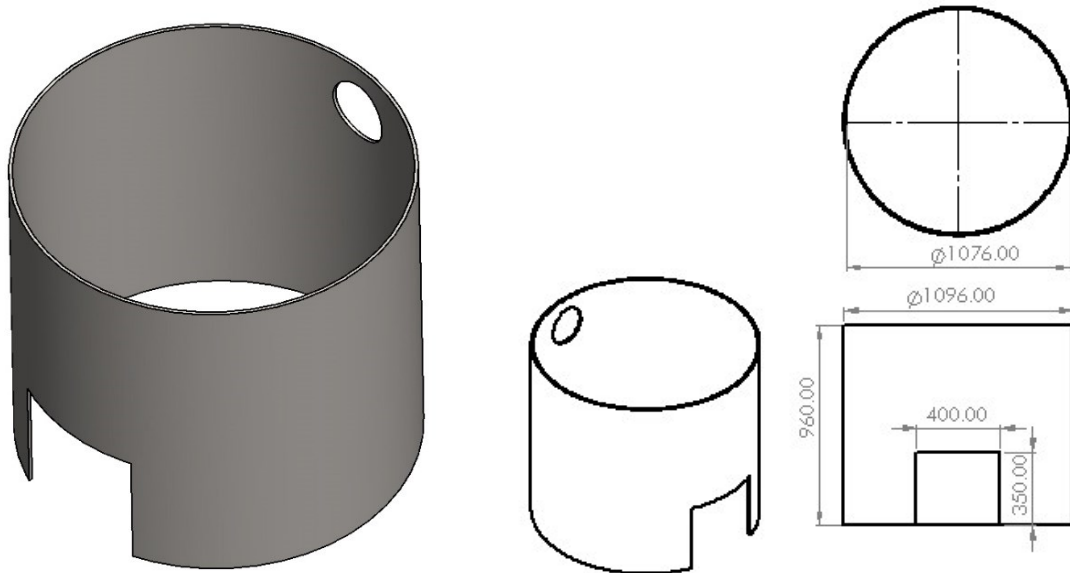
Middle Sheet Metal with its dimensions of Cylindrical Cook-Stove Model.
